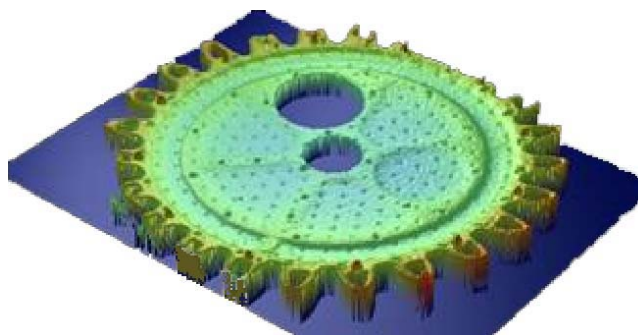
The optical shutter is a polysilicon gear, fabricated using micro-machining technology.
